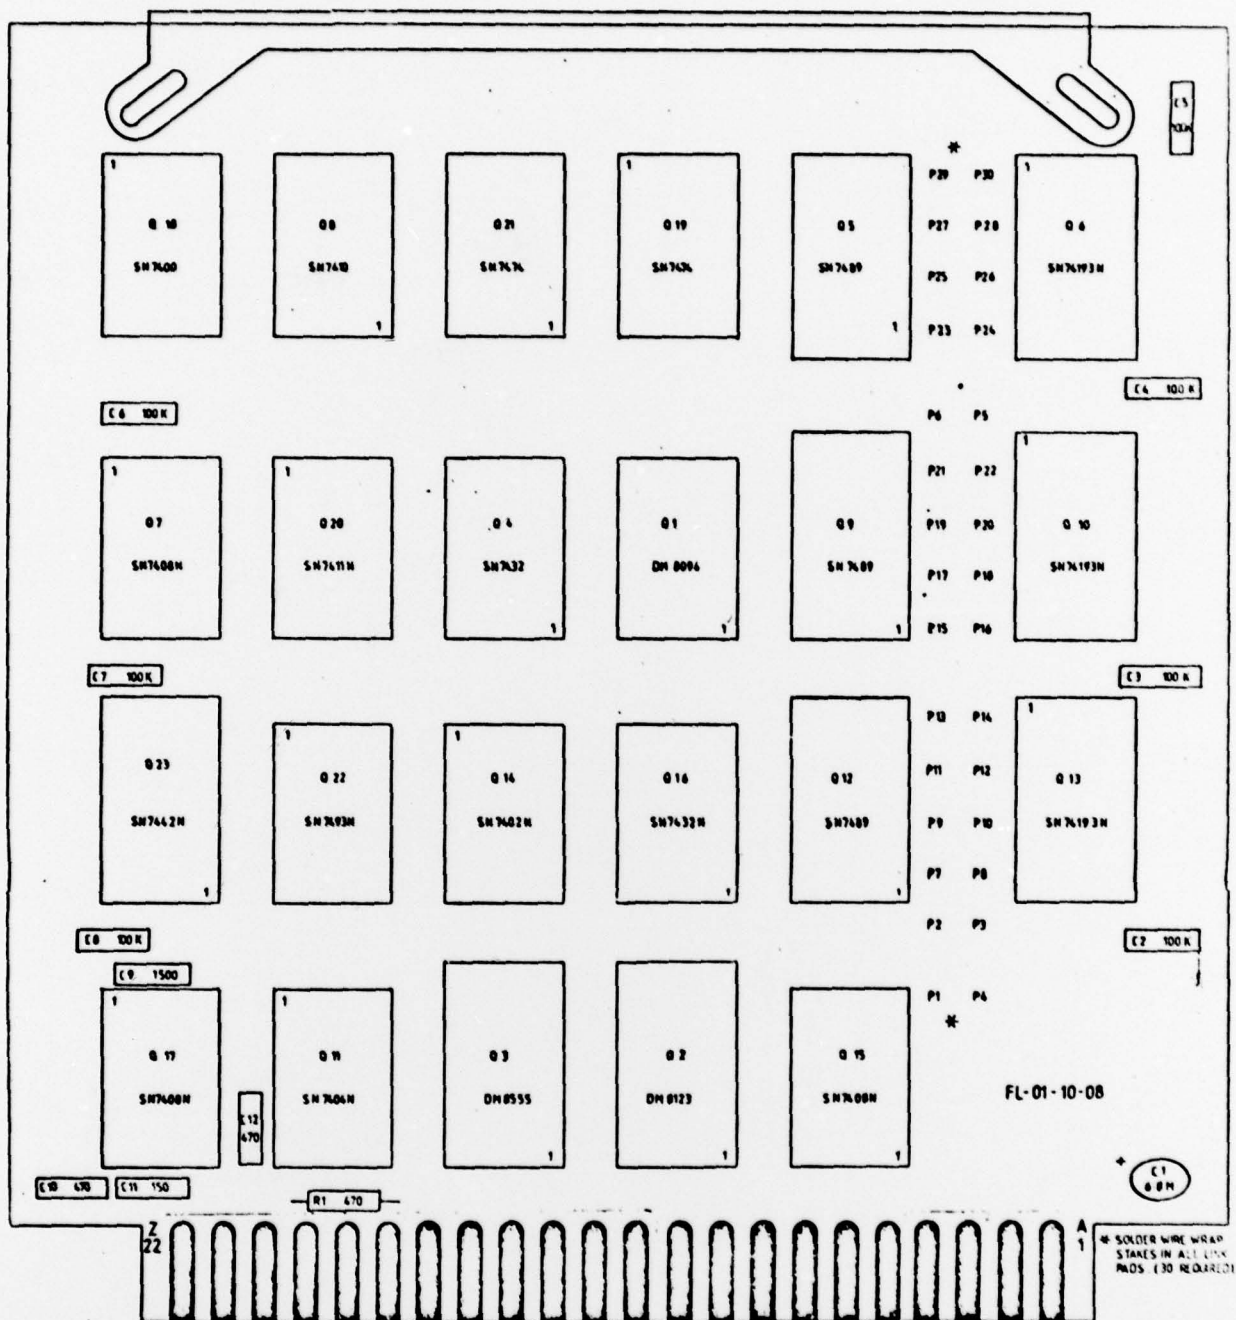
COMPONENT LAYOUT FOR PRE COUNTER
